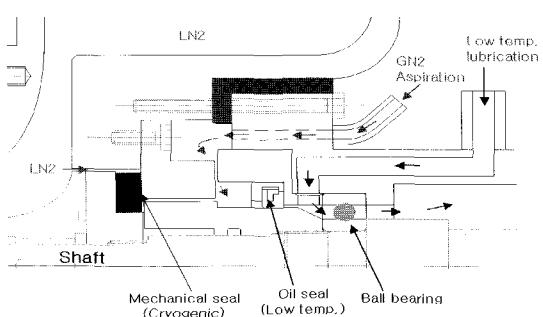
Conceptual drawing of bearing lubrication and seal system
